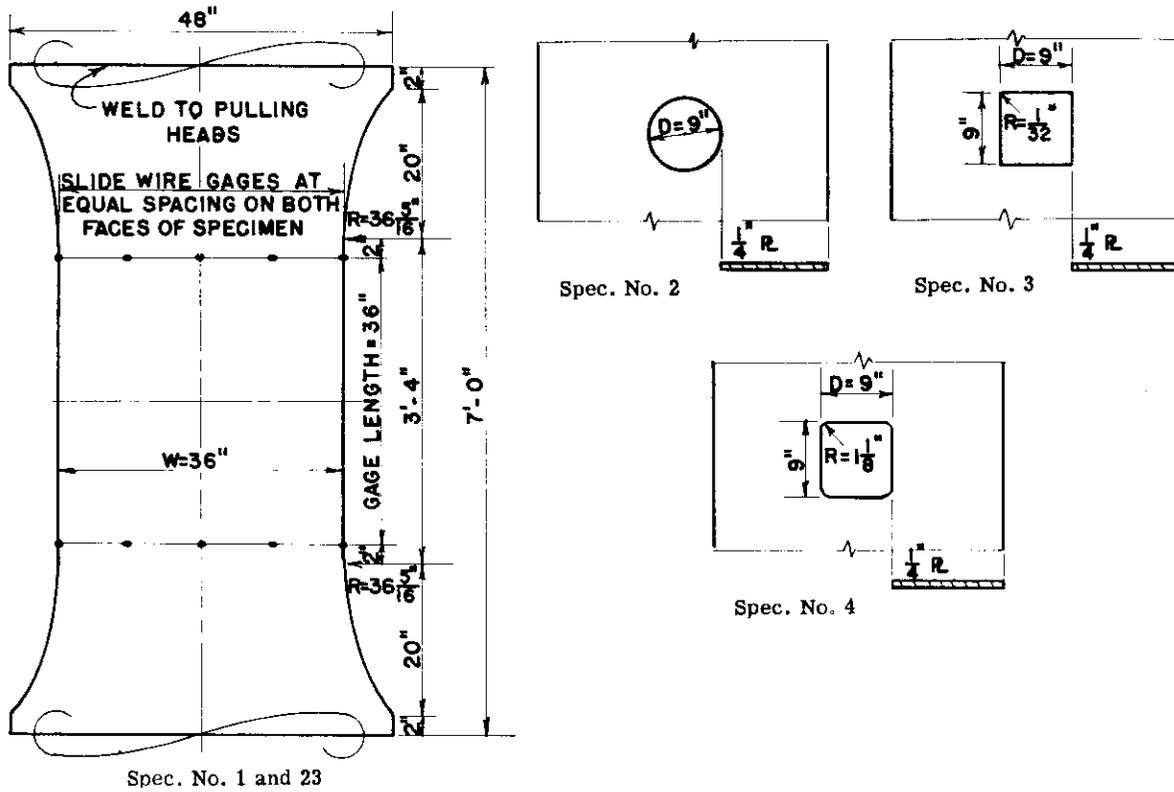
Details of Plain Plates and Plates with Unreinforced Openings.
